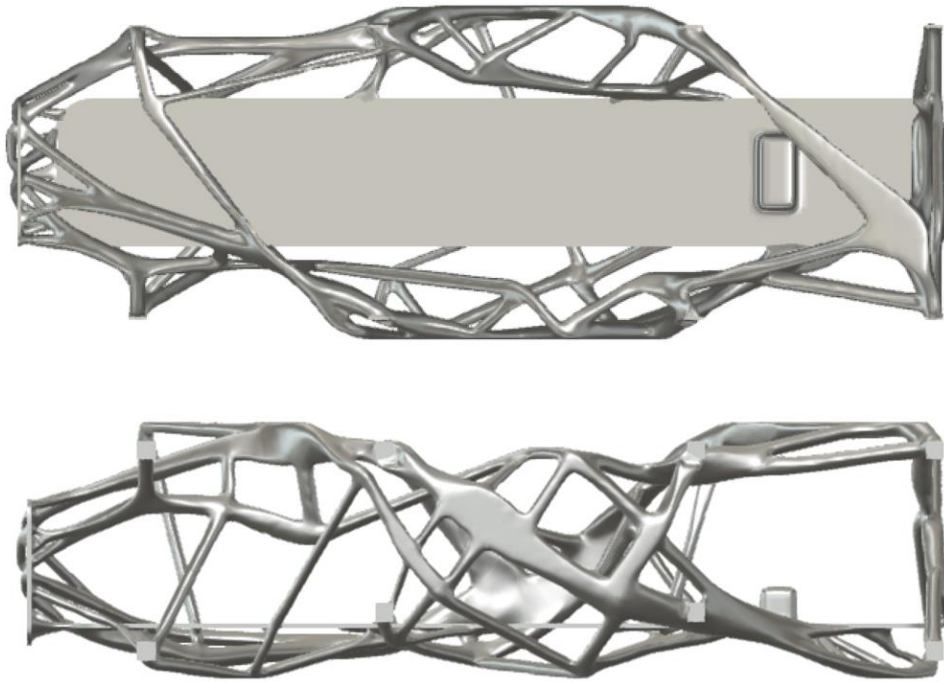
; Top & Side View, Aluminium AlSi10Mg, 3D print
